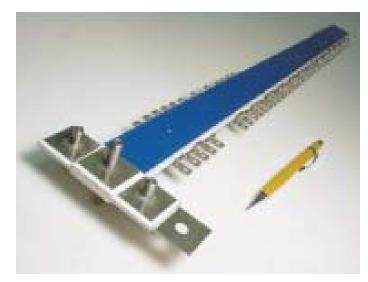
Laminated bus bar assembly, manufactured by Bussco [29].
